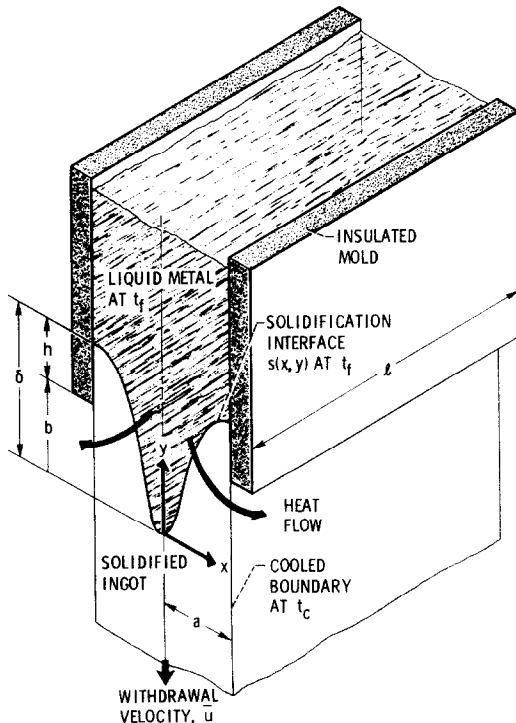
Slab ingot being withdrawn from a mold in continuous casting.
